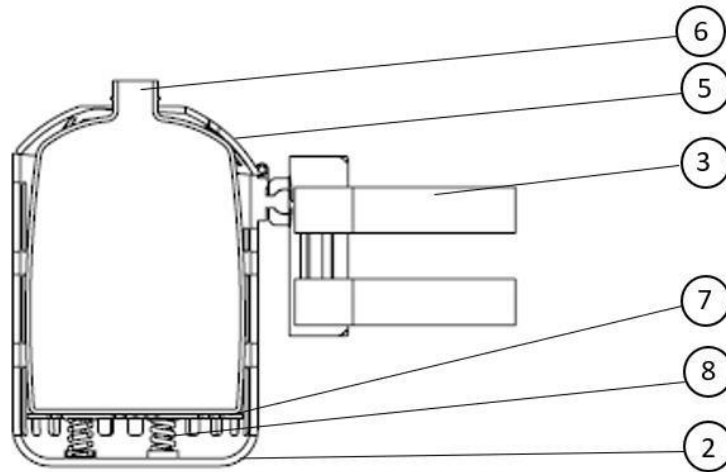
Interior sectional view of wearable modular chest tube carrying apparatus for lower extremities
